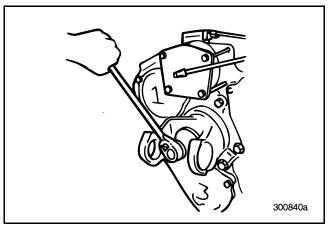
Removing Clamp Plate and Capscrew (T313L/T318L Shown)
